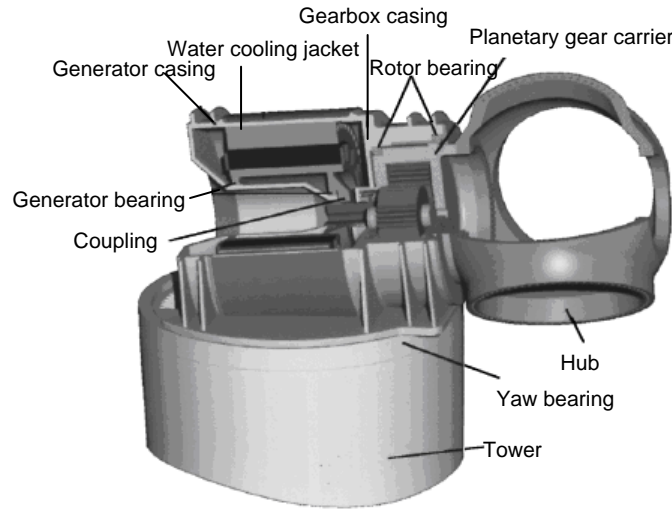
Configuration of a wind generator design with a single-stage gearbox [8]
